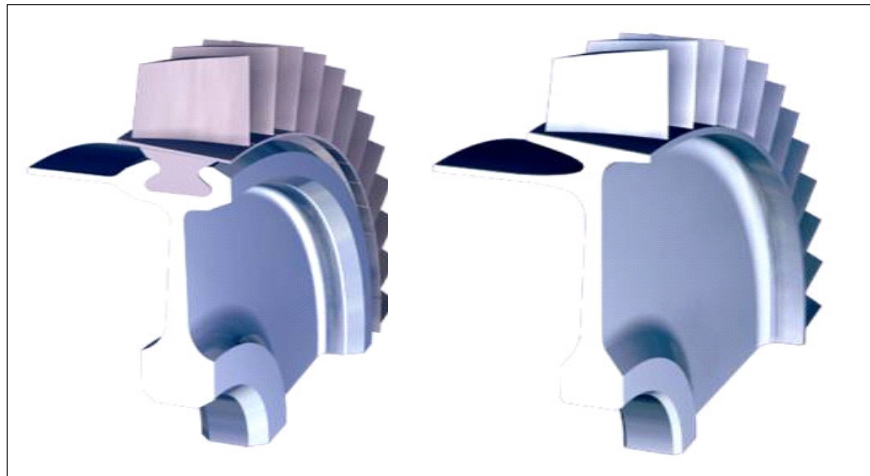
Comparison of Traditional Bladed Rotor with Integral Bladed Disk
